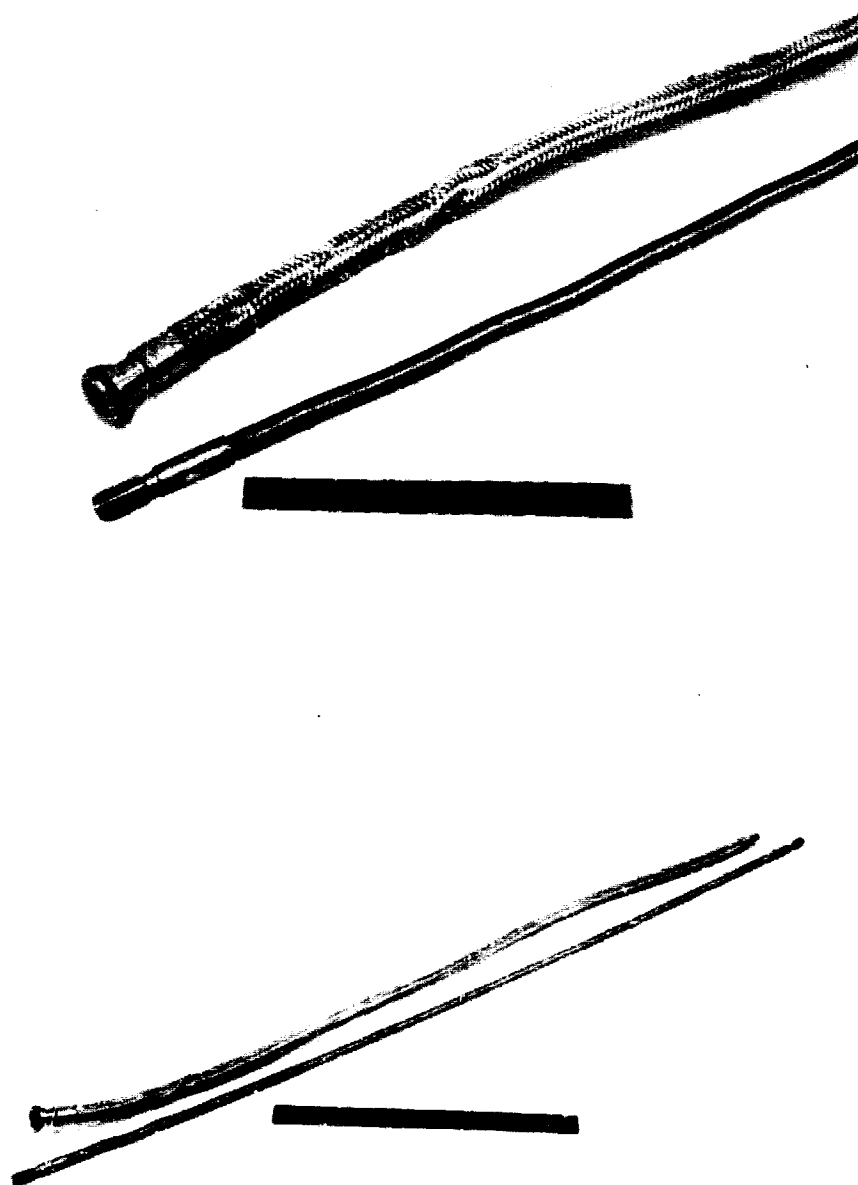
763402-1 FLEXIBLE SHAFT
